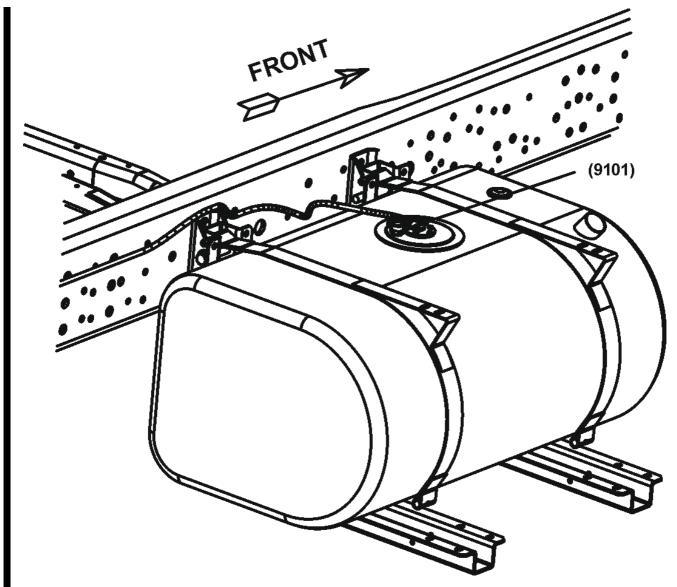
Fuel Sensor Connector Locations (Right Side Mount Fuel Tank Shown)
